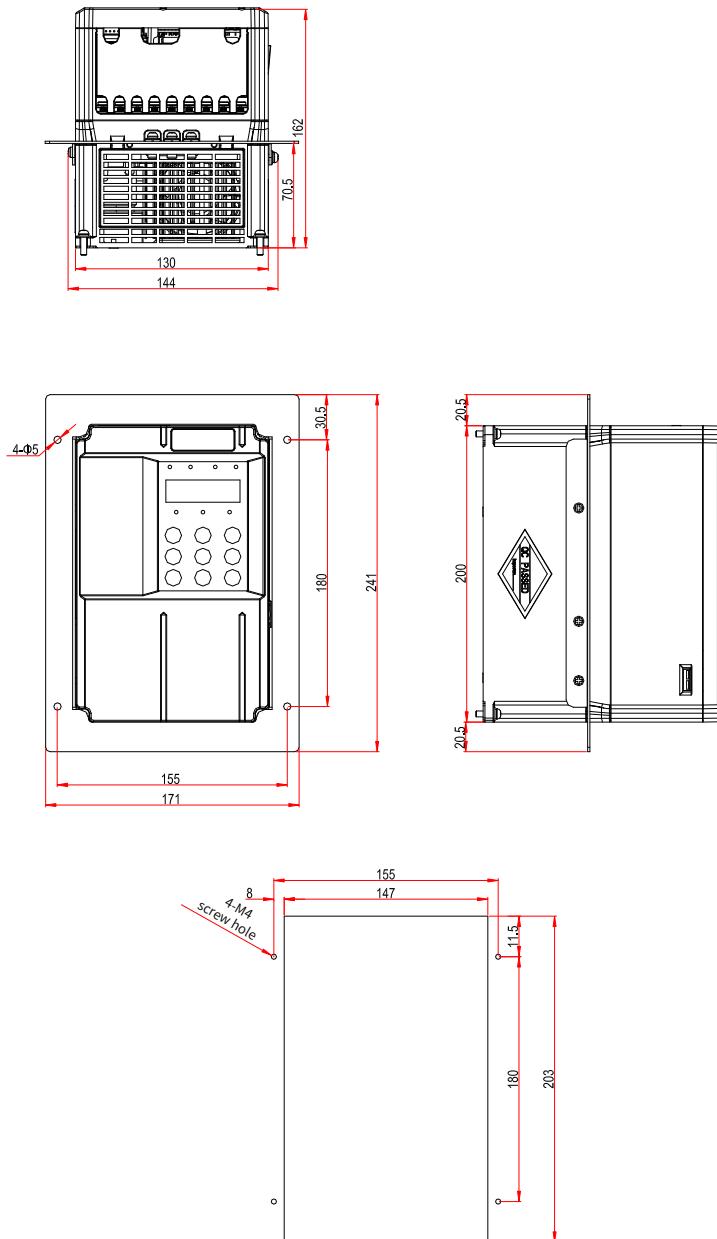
Through-hole mounting bracket and mounting hole dimensions for 3.7-5.5 kW AC drive models (mm)
